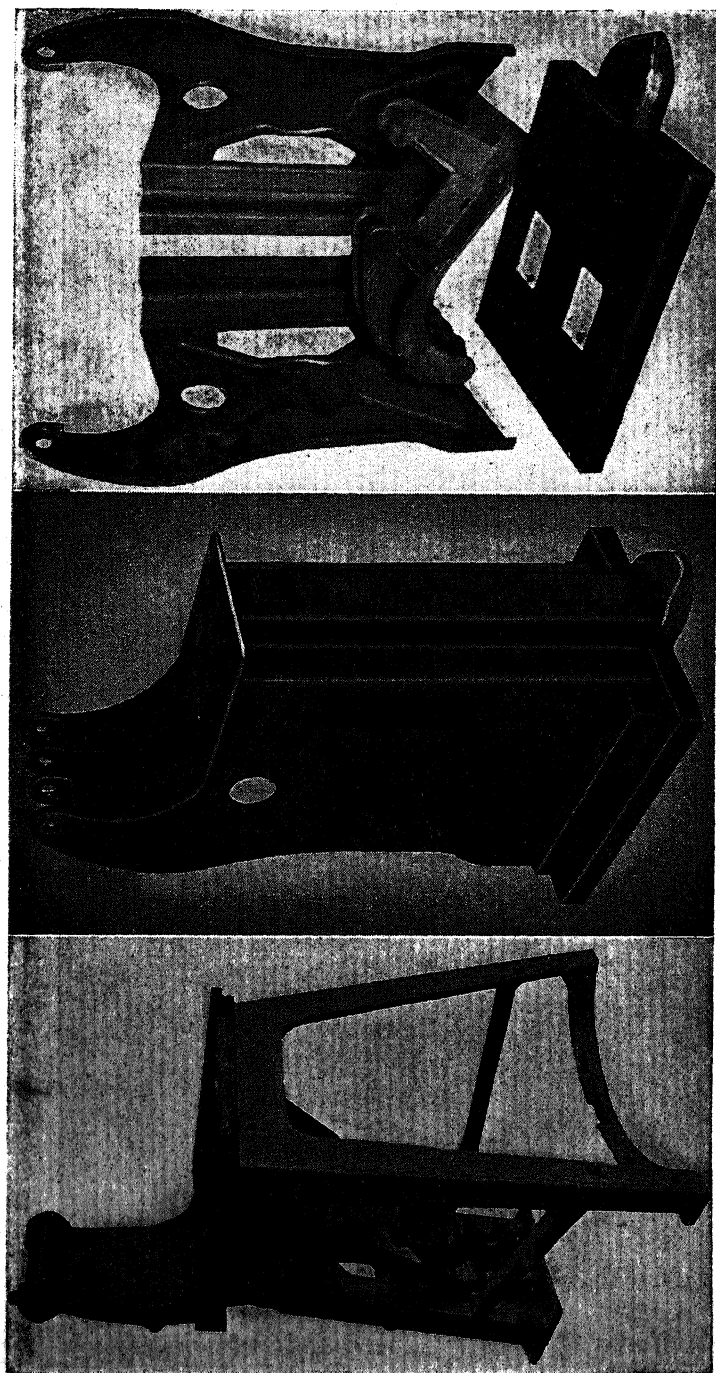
Design for Functional Requirements. In the case of this guernsey press, the welded steel frame, design for functional requirements with welded steel produced the results shown. The former cast and bolted design is shown on the left. The welded one-piece frame (center), comprising the fabricated base, pressed steel sides and cast steel top, provides greater rigidity for 40% faster operation and saves production costs.
